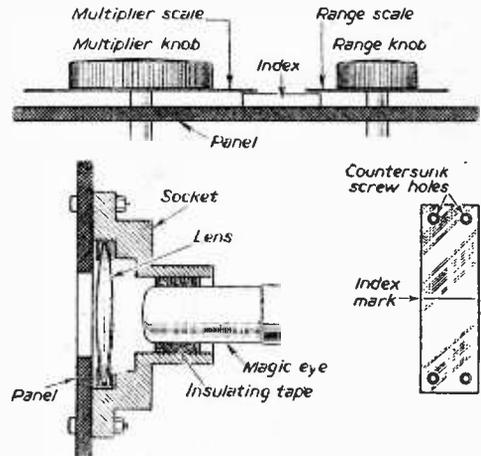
Section of escutcheon for magic eye, and indicator mounting details.
